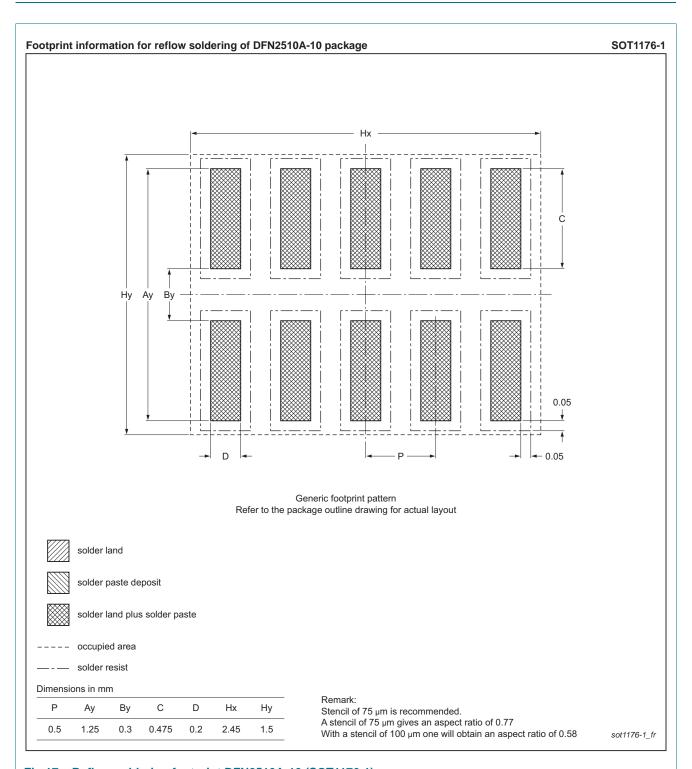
Reflow soldering footprint DFN2510A-10 (SOT1176-1)
